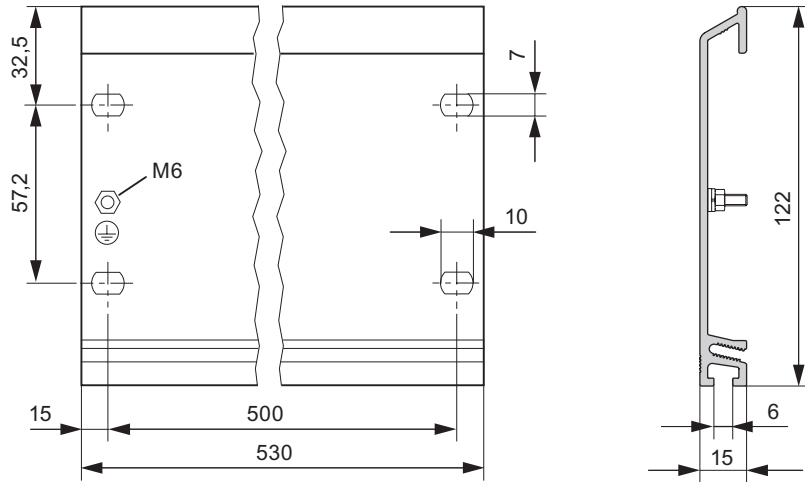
Dimensional drawing of the mounting rail with standard width of 530 mm.
